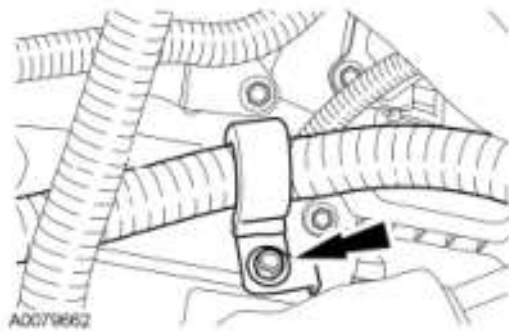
Locating Starter Wiring Harness Support Bracket And Bolt
